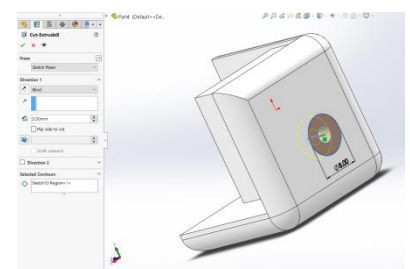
Extrude-cut to make a hole in the corner for the head of screw
